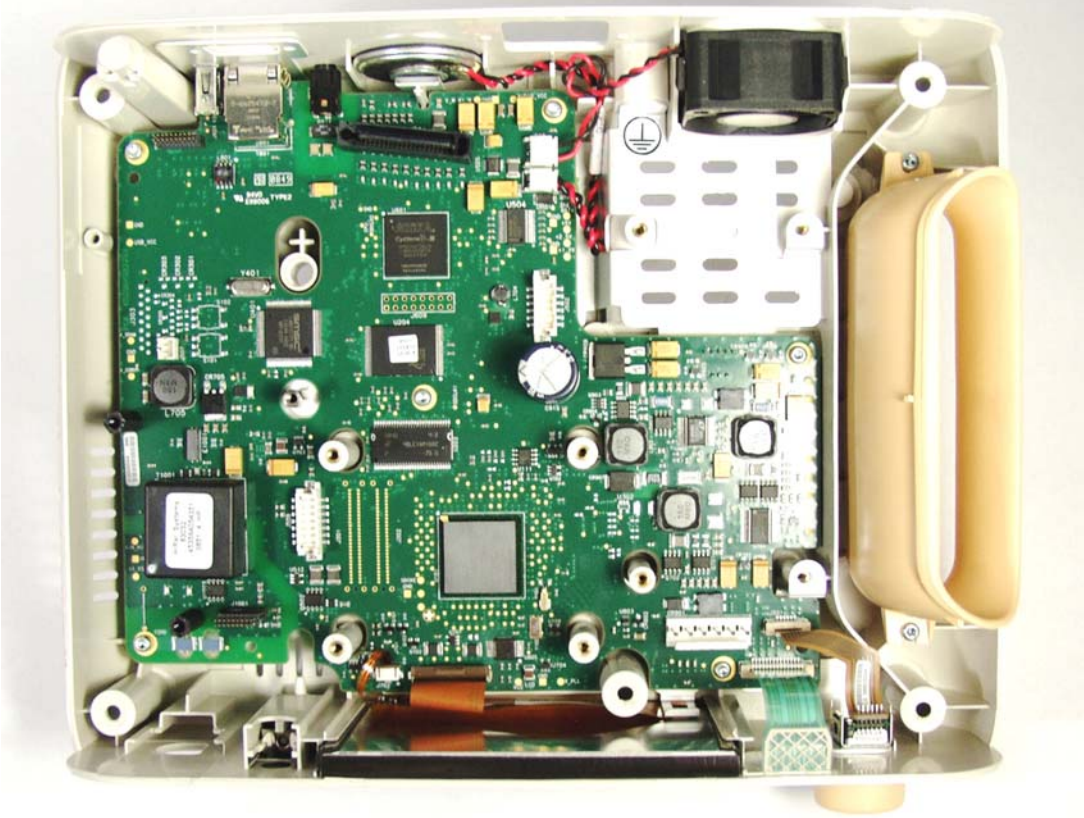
Bottom case main board stripped of Power supply, Sp02, etC02, & AC inlet removed from sidewall.
